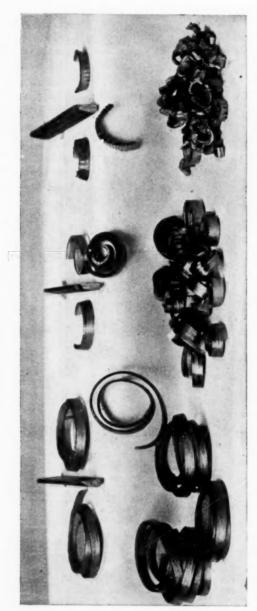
Samples of Chips and Cutters: Cutting Angles from Lept to Right 45 deg., 60 deg. and 75 deg. These Chips WERE PRODUCED IN AN ENGINE LATHE WITH HOLDER SHOWN IN FIG. 12
